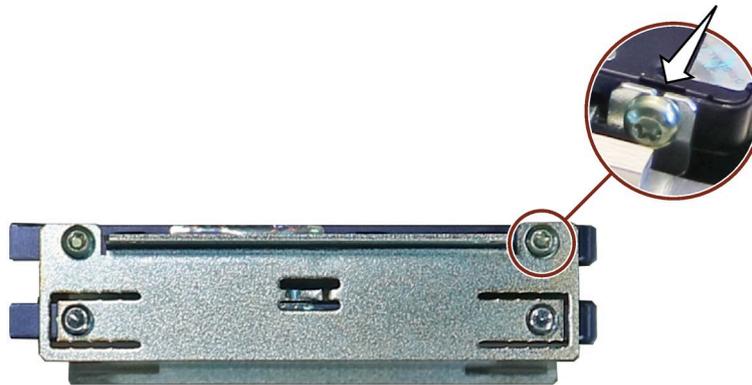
mounting bracket with 2 drives (for drive cage type B)
